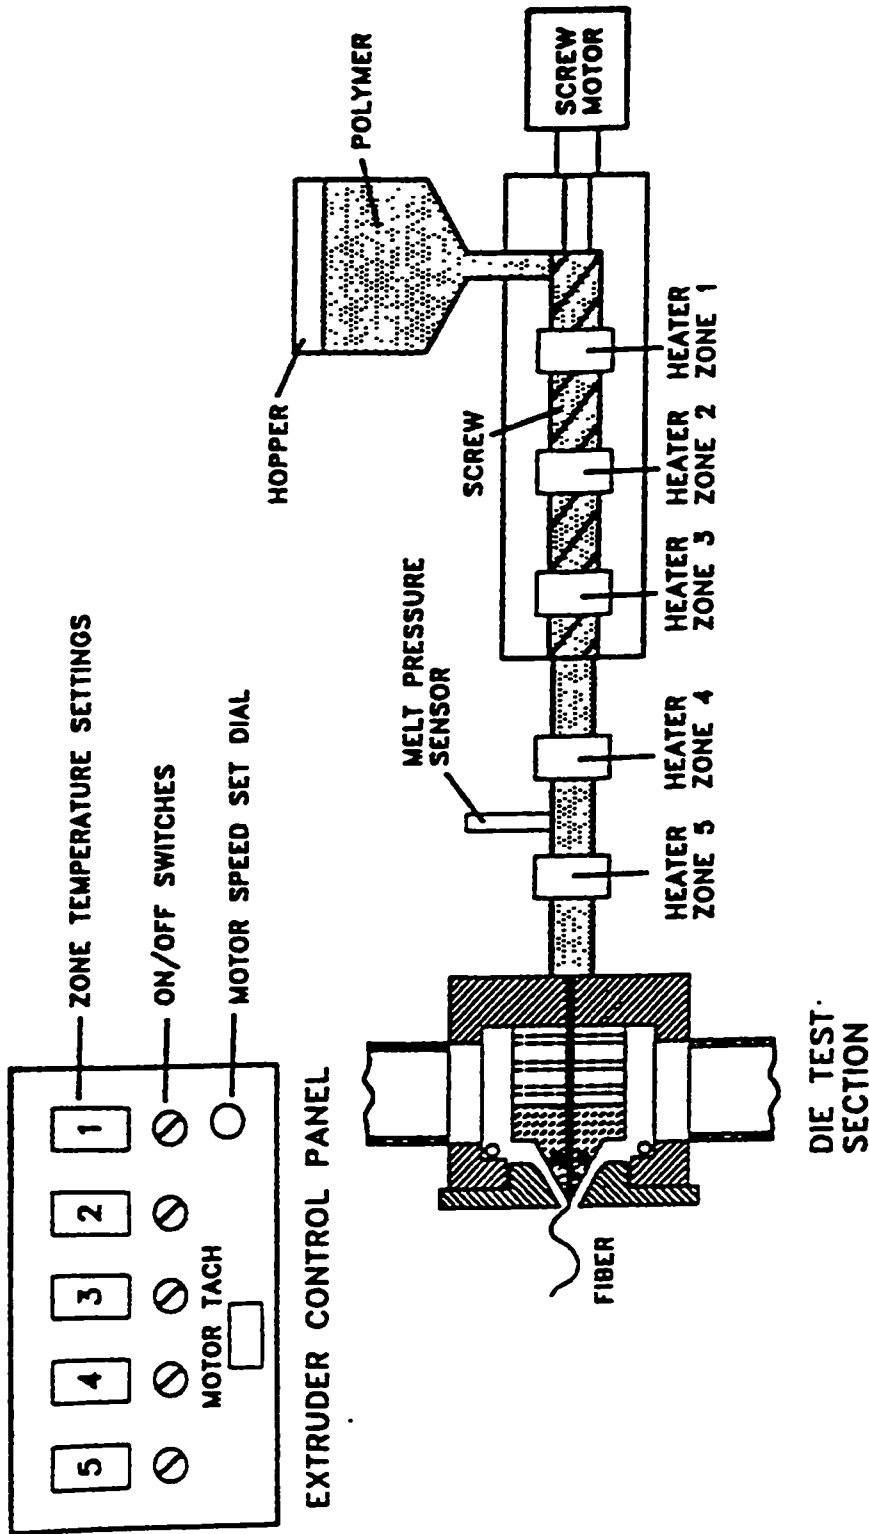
Cross-sectional View of the Single Screw Extruder and the Die Test Section
